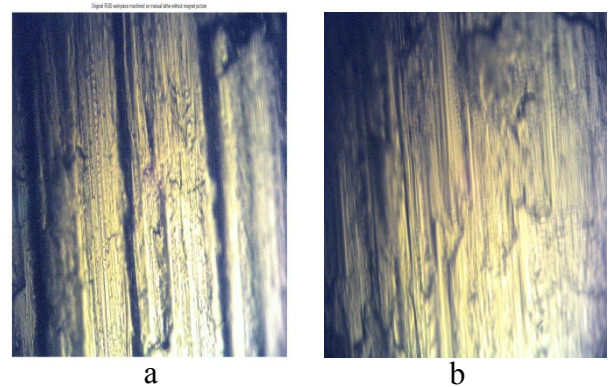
Surface of the work piece after machining a) without magnet; b) with magnet
